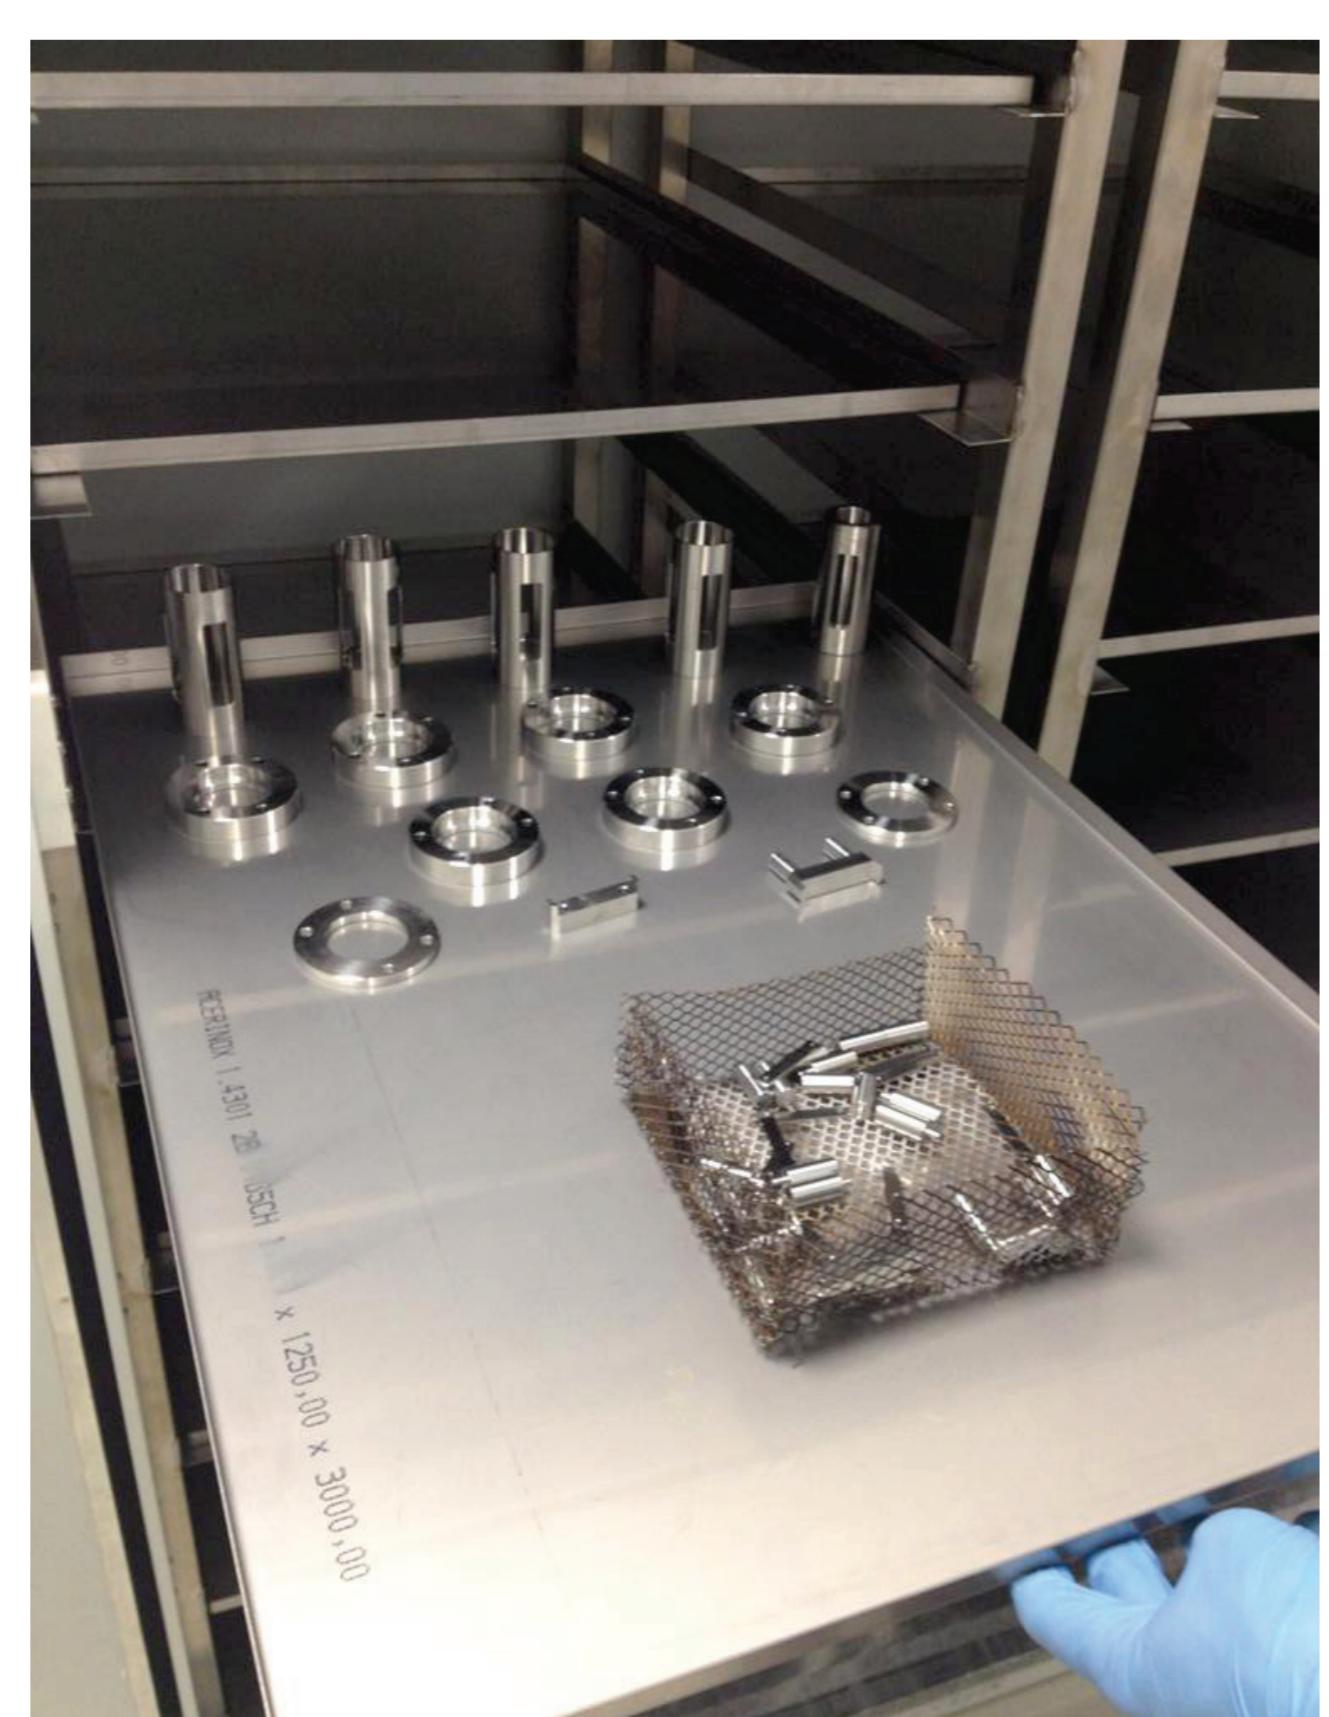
Vacuum cleaning and treatment of BPM components in Oven before welding
